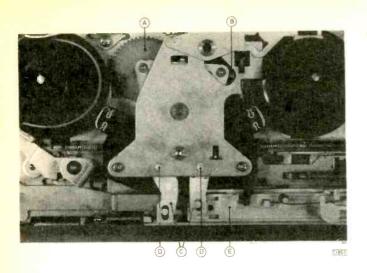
Operating levers and drive-gear assembly. Key: A reverse drive gear; B forward drive gear; C gear levers; D gear lever pivots; E slide bars/operating levers.
